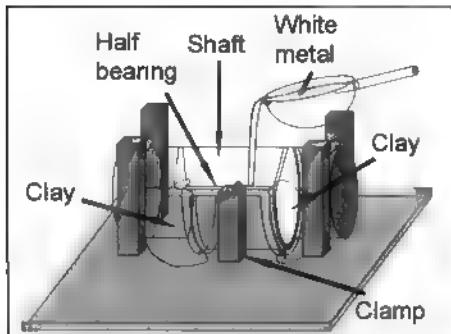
Pouring white metal into a half bearing. Both the bearing and the shell must be firmly secured in place with clamps and not just rely on the clay to hold them.
